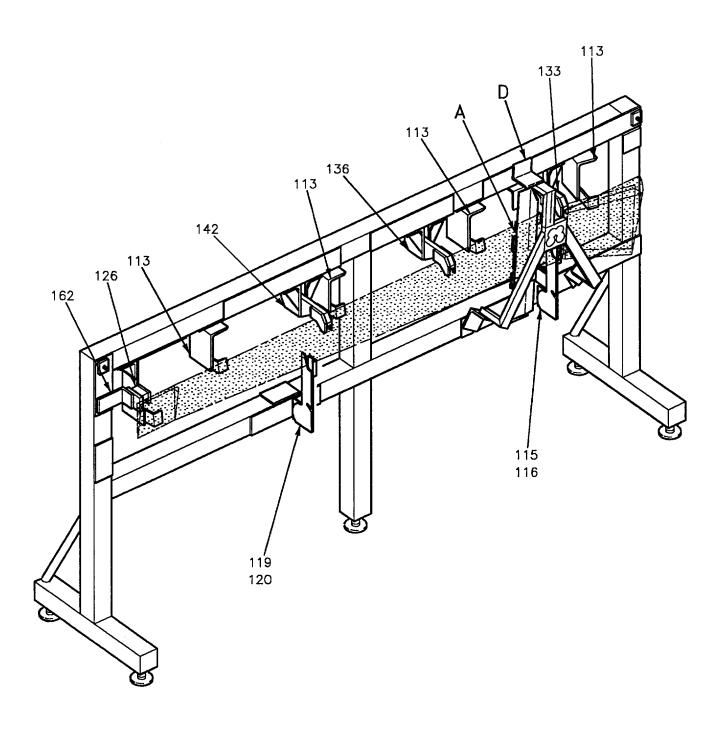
Outboard Drive Arm, 74A180740 (Sheet 5)
